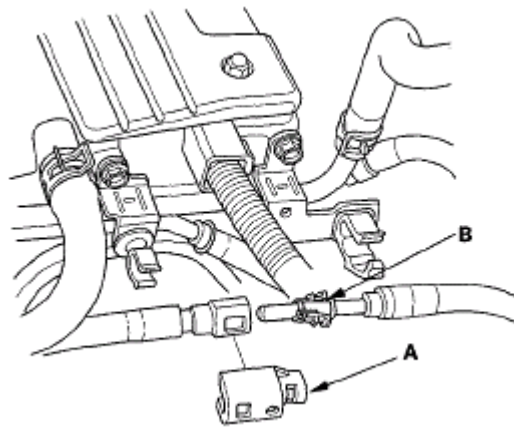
Identifying Quick-Connect Fitting Cover And Fuel Feed Hose
